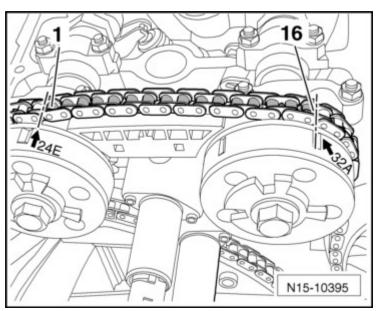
Identifying Alignment Of Mark On Exhaust Camshaft Adjuster With Left Notch On Control Housing
